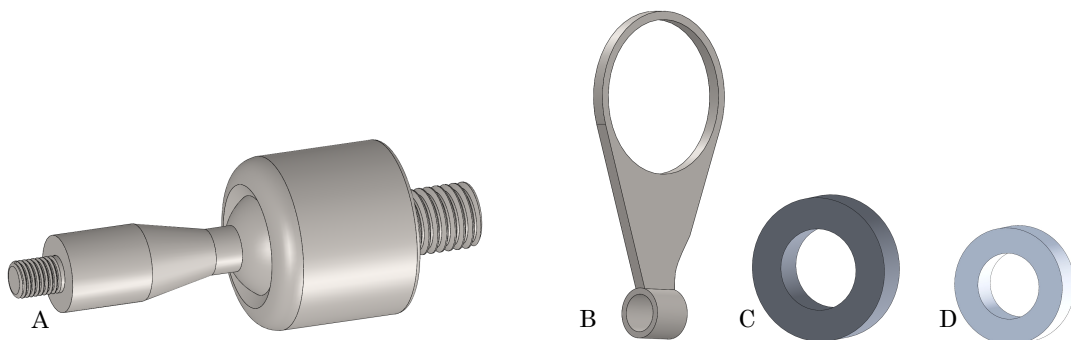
A: Modified automotive ball joint with M8 at the end to fit thrust cell. B: Torque cell lever. C: Spaced for torque cell. D: Nylon bushing.
